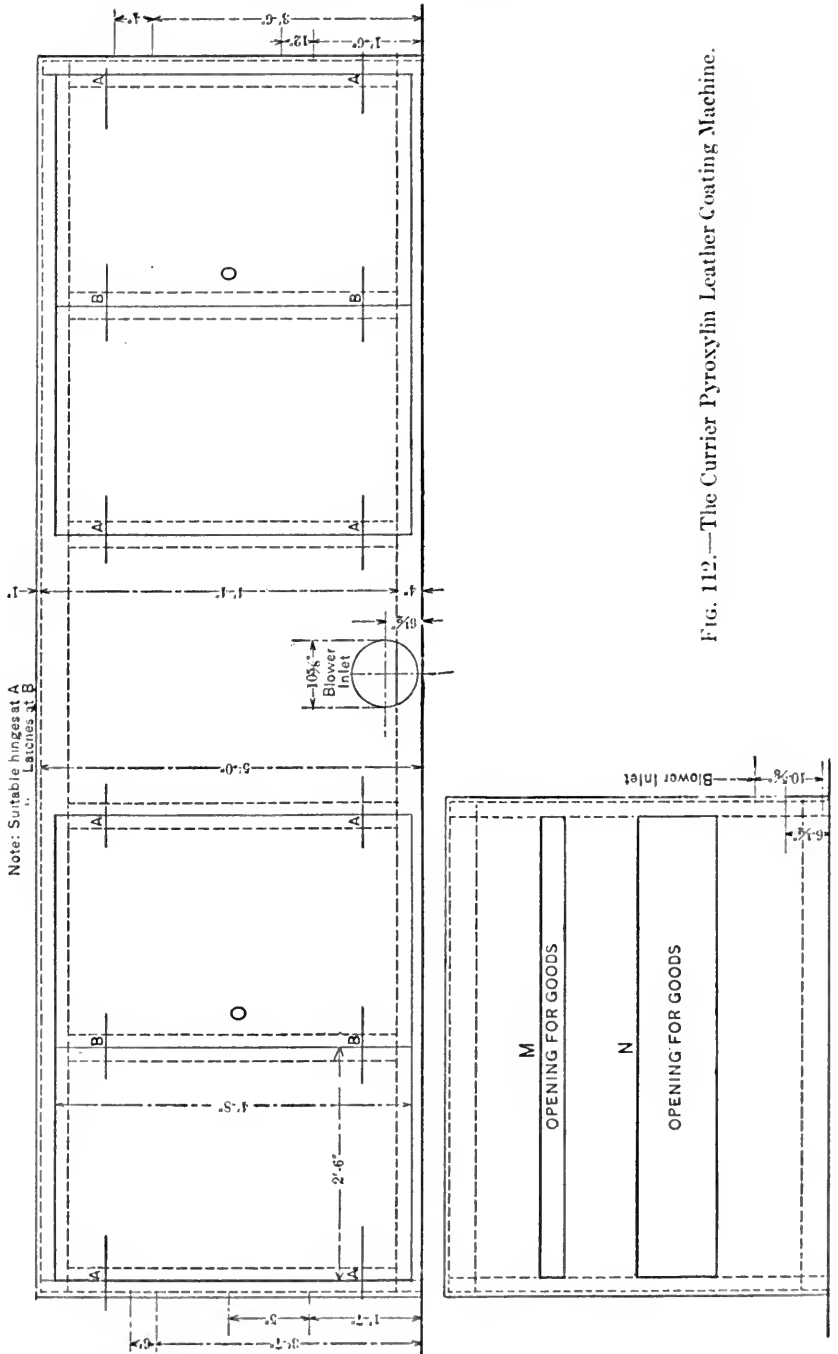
The Carrier Pyroxylin Leather Coating Machine.
